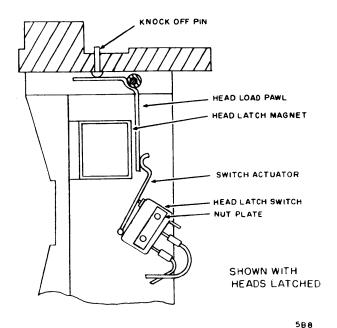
Head Latch Switch (S304) Adjustment (Shown without TB204)
